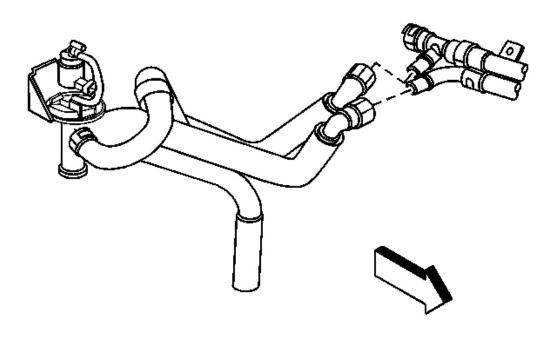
View Of Auxiliary Heater Inlet & Outlet Hose/Pipe Assembly Courtesy of GENERAL MOTORS CORP.
